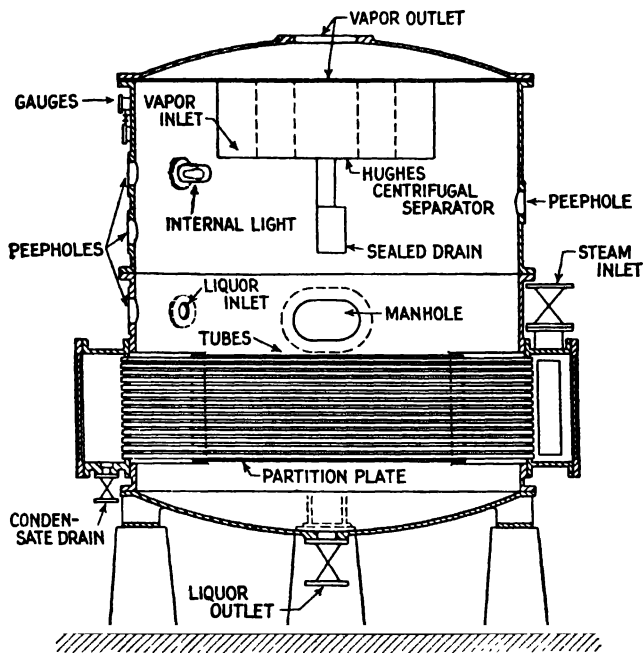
Zarembo Horizontal Tube Evaporator. Courtesy Zarembo Company, Buffalo, N. Y.
